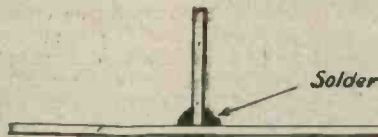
A soldered "T" or butt-joint may give trouble, although apparently sound.
